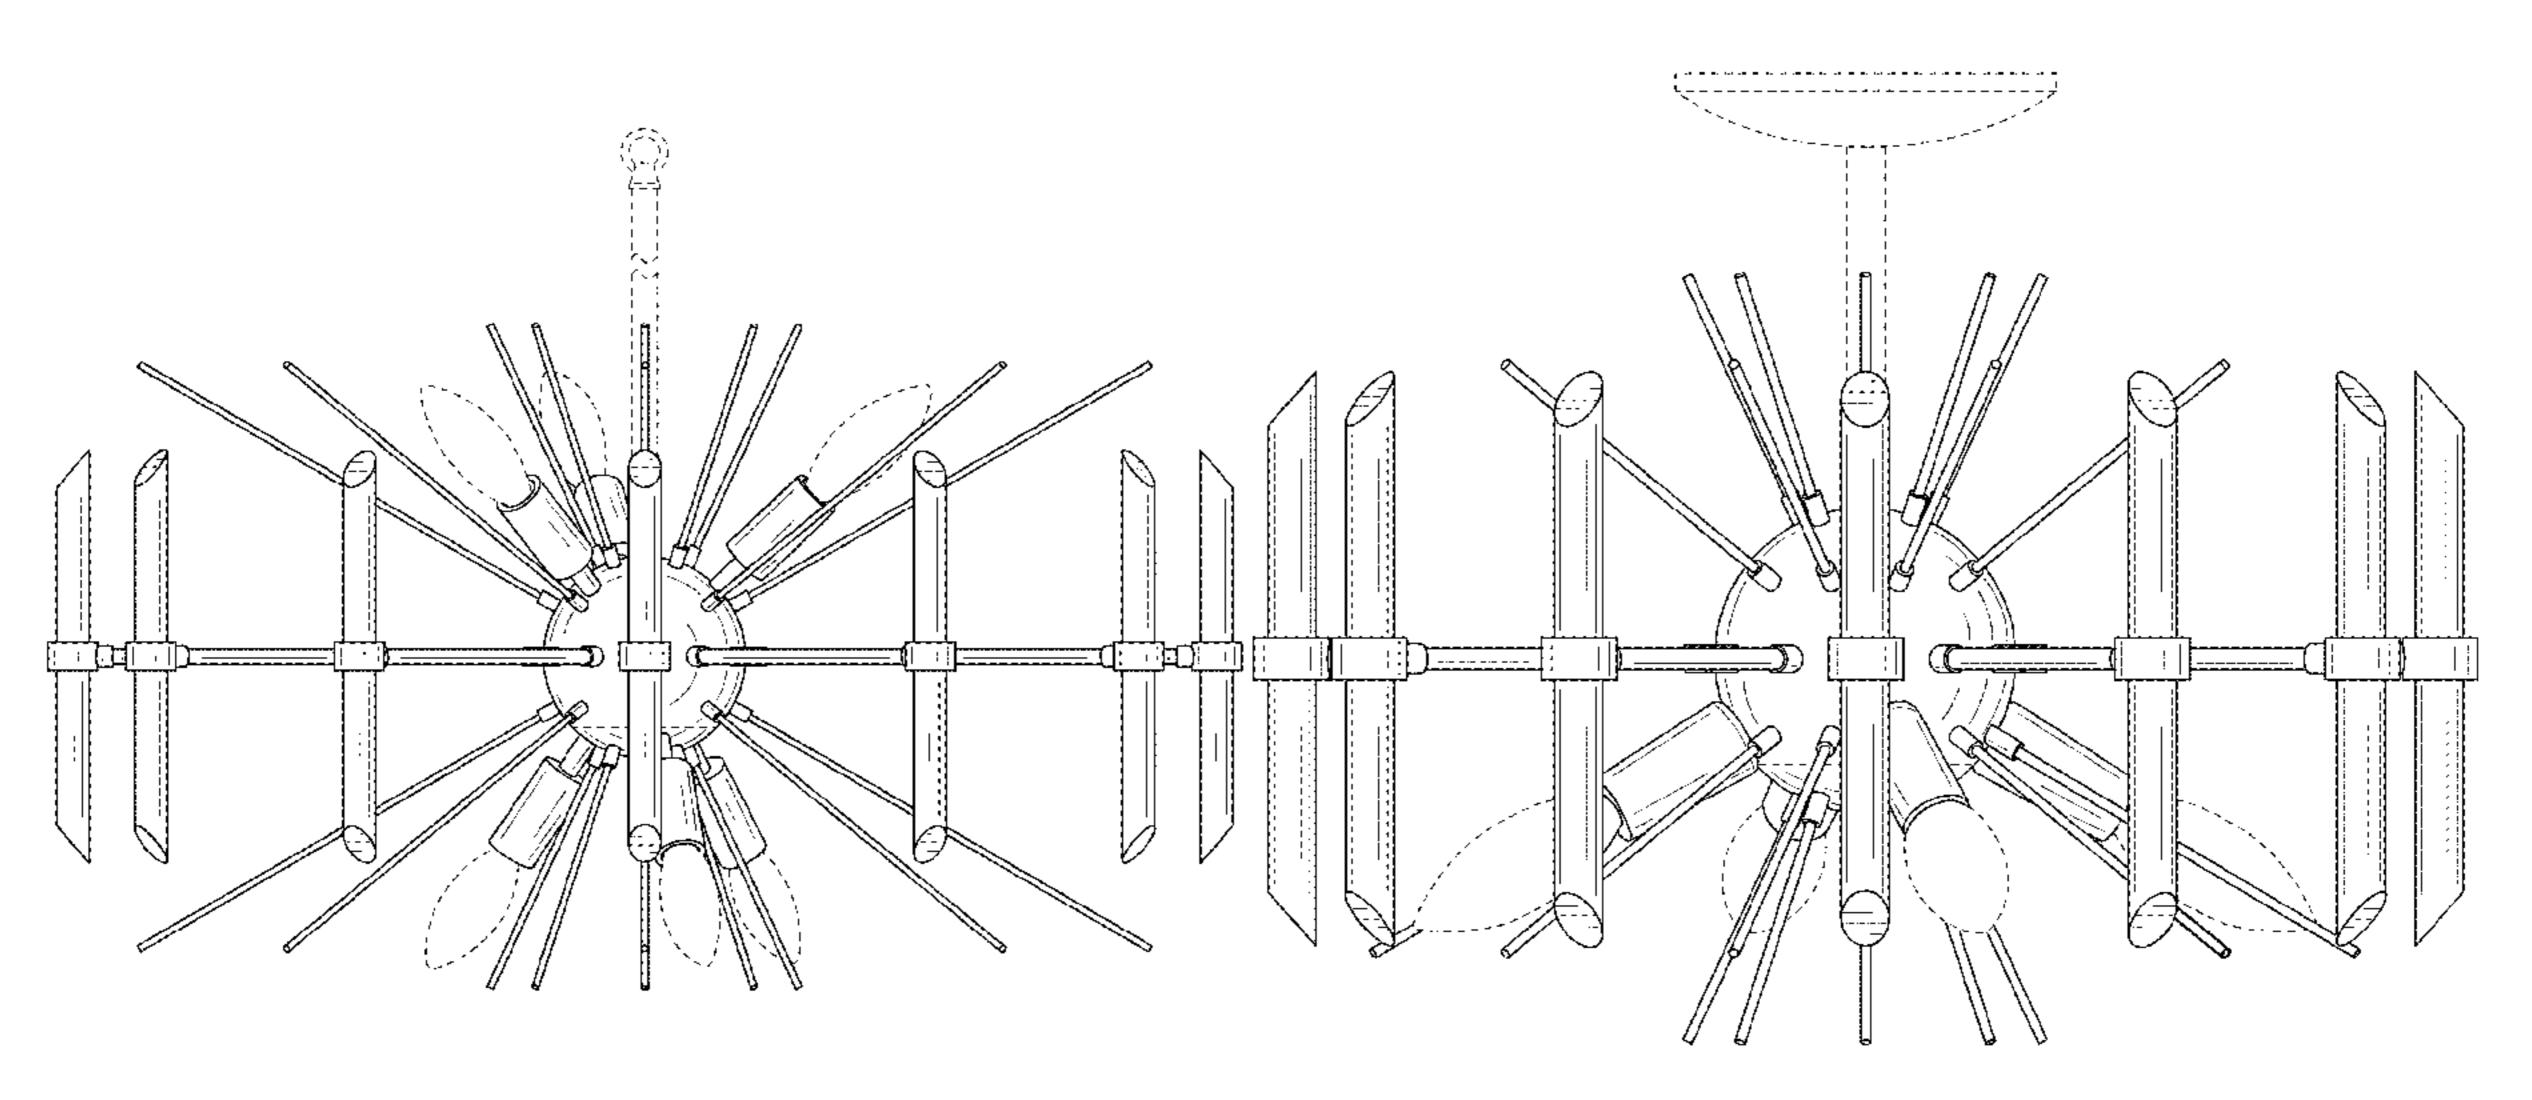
is a side elevation view of the lighting fixture of FIG.
